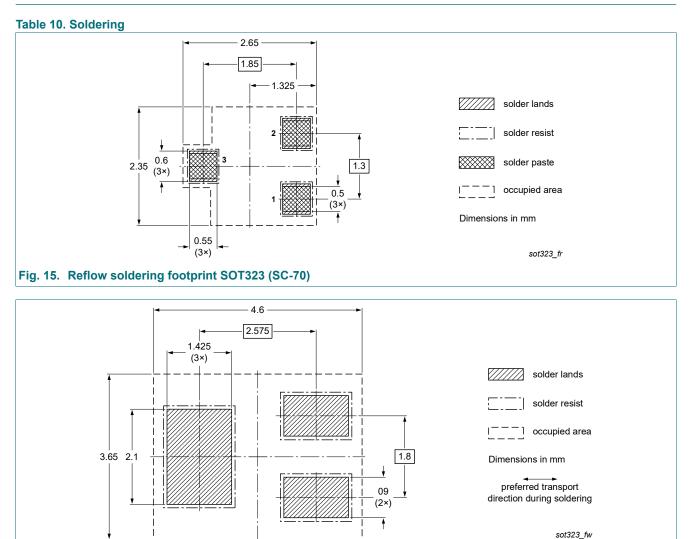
Wave soldering footprint SOT323 (SC-70)
